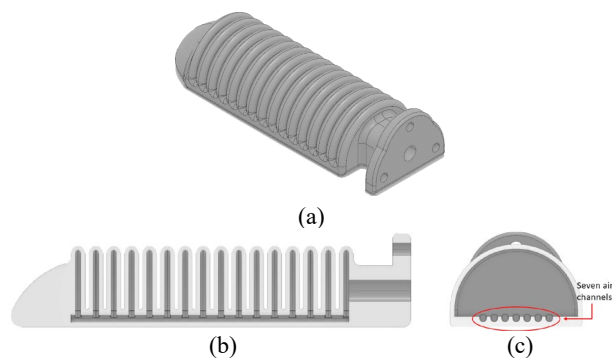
Overview of the design: (a) Soft pneumatic actuator. (b) Cross-section view of the soft actuator. (c) Seven air channels of the soft actuator.
